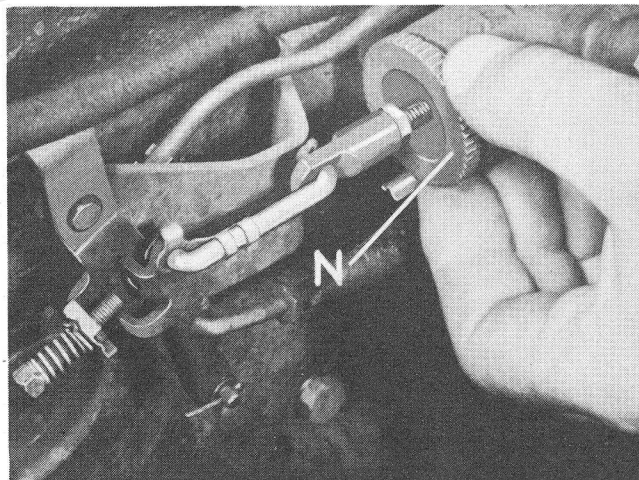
Adjusting Body Plug (N) to Obtain Correct Clutch Engagement for Making Fast Starts
